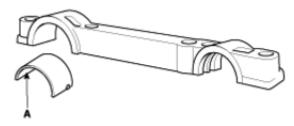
Identifying Exhaust Cam Shaft Upper Bearing Courtesy of HYUNDAI MOTOR CO.
